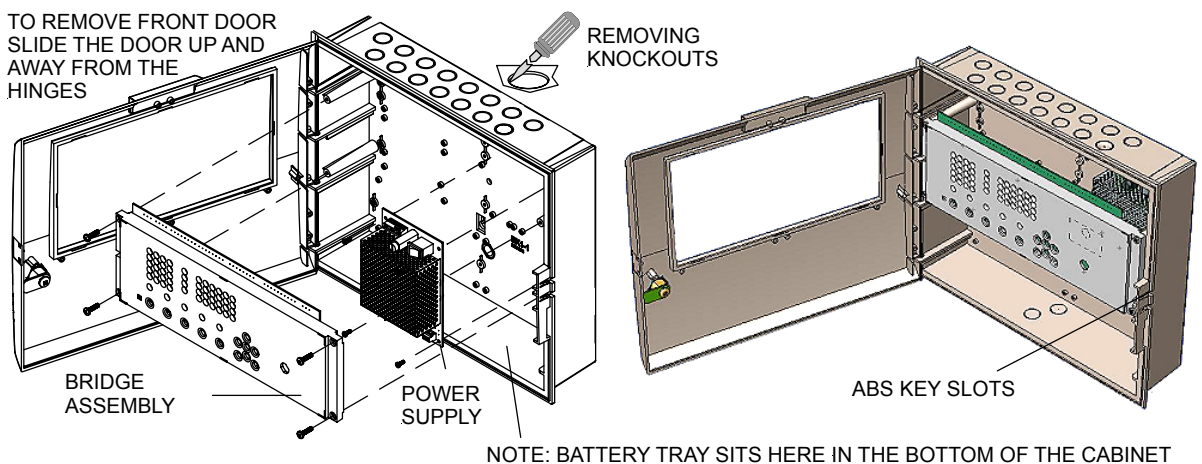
Exploded and Assembled View of the Basic ABS Model FACP with 003 Key Entry
